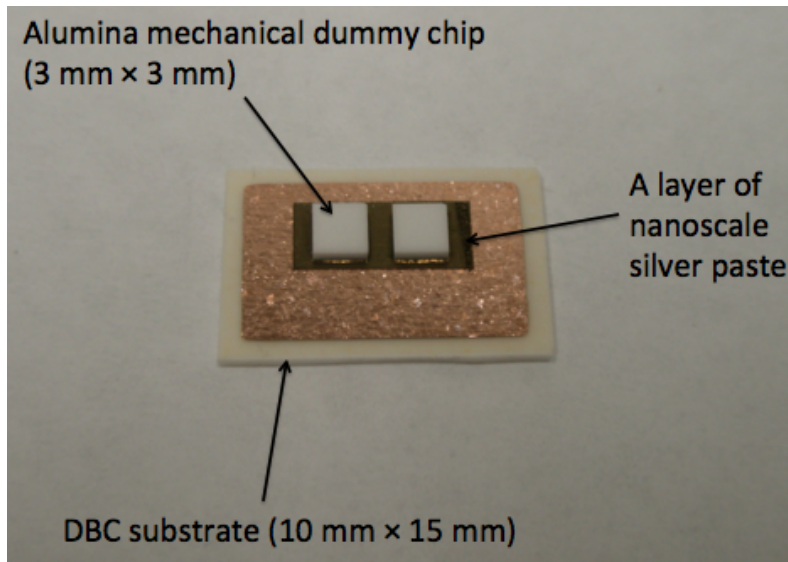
Sample configuration of 3 mm x 3 mm die-attachment on Cu surface before sintering.
